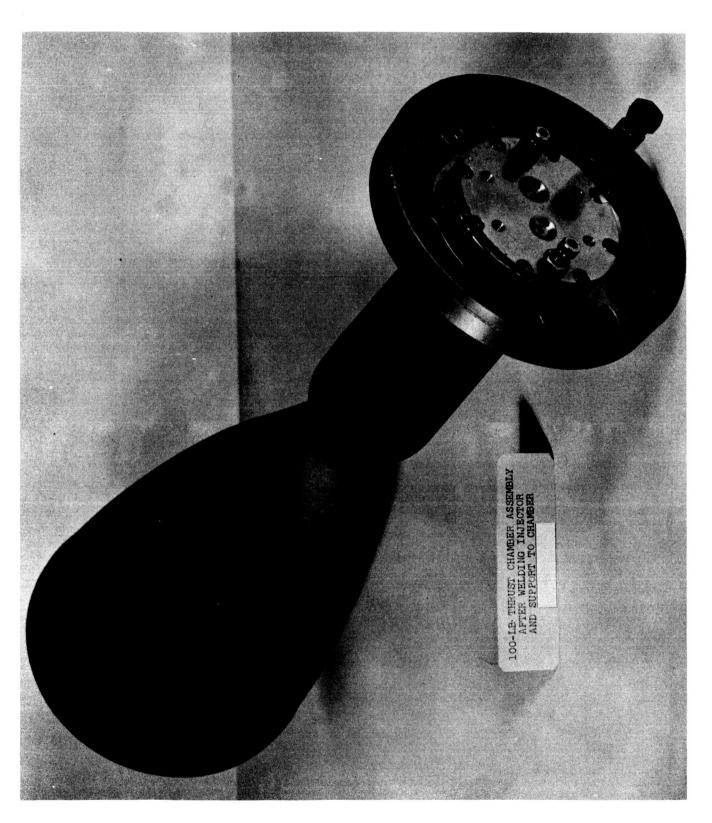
100-lb Thrust Chamber Assembly After Welding Injector and Support to Chamber
